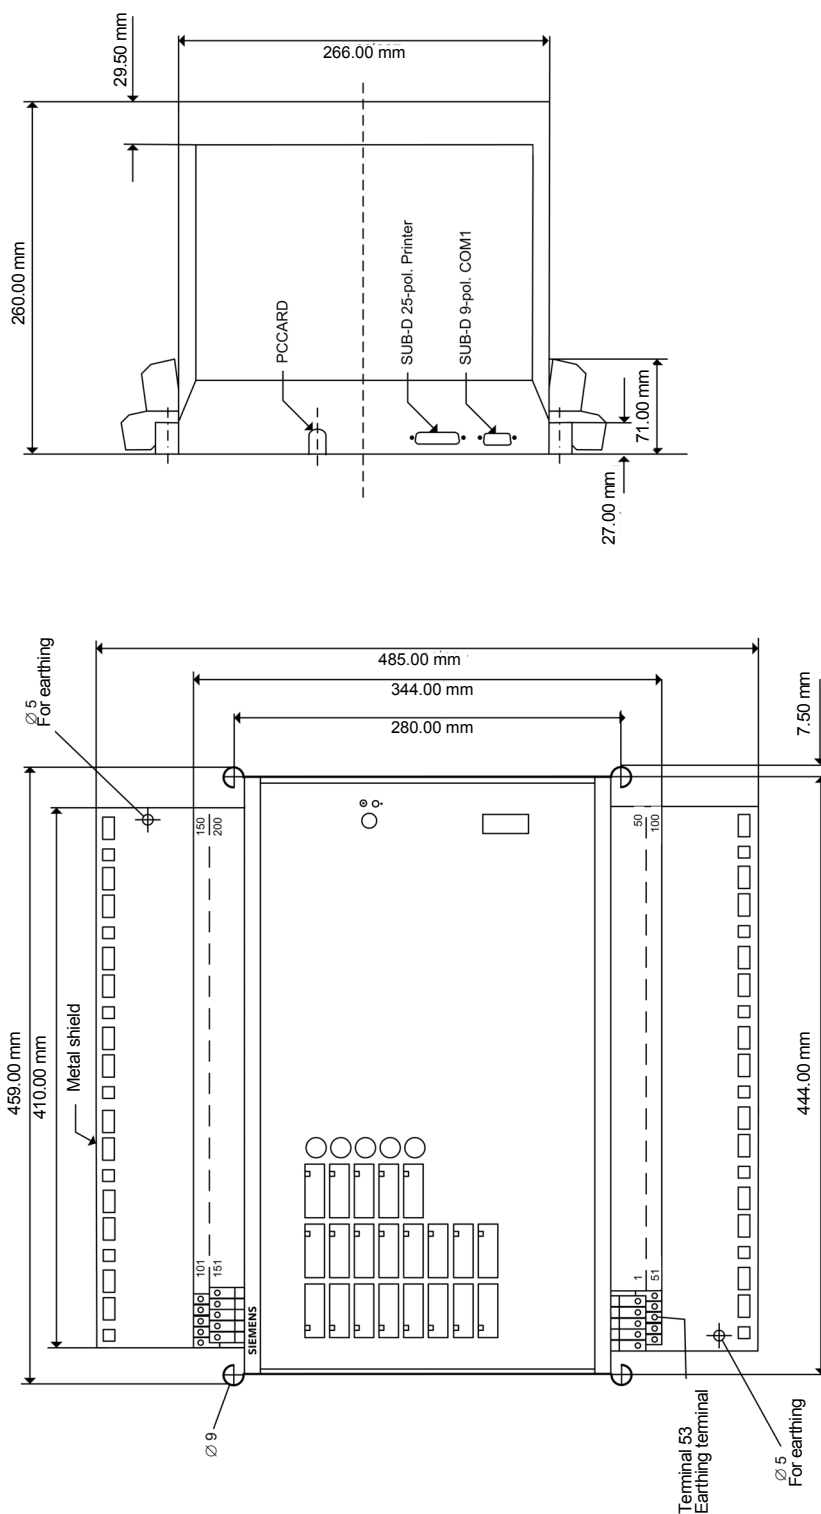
Dimensional drawing, 19-inch frame; ZE 32/64
